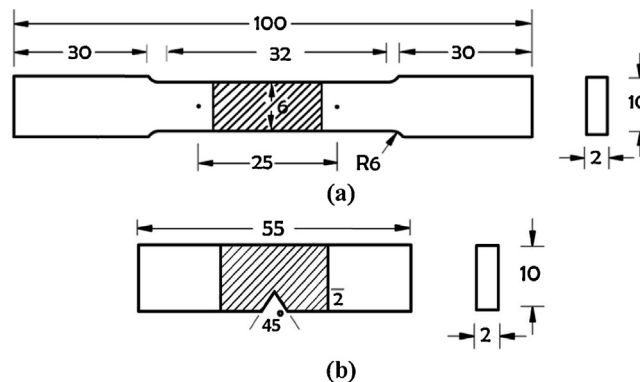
Sample dimensions used for (a) tensile test, (b) impact test (all dimensions are in 'mm').
